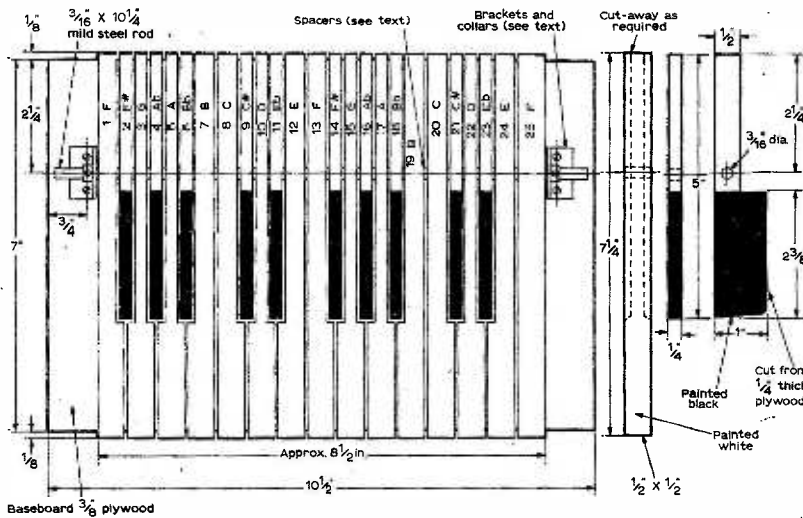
Plan view of the keyboard with key dimensions given on the right.
